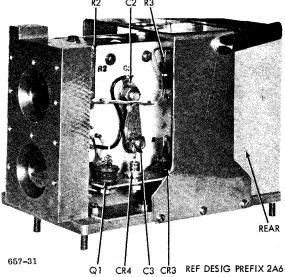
+28 Volt DC Power Supply, Assembly 2A6, Test Points and Parts Location
